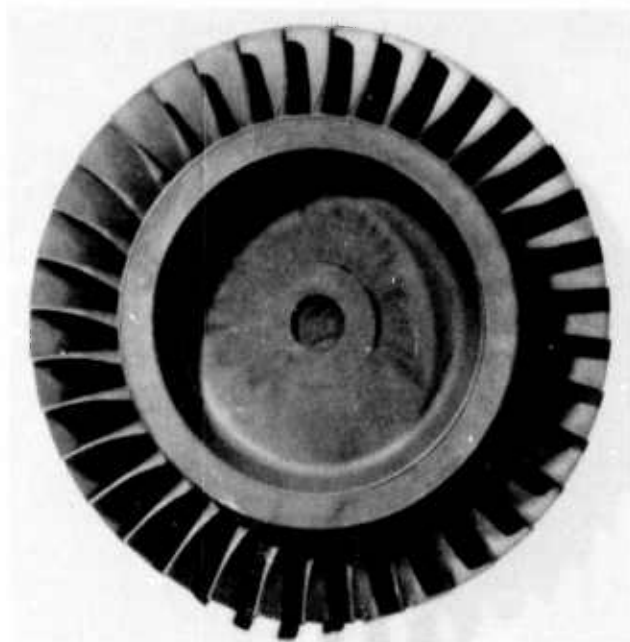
Injection Molded Blade Ring for the Duo-Density Rotor
